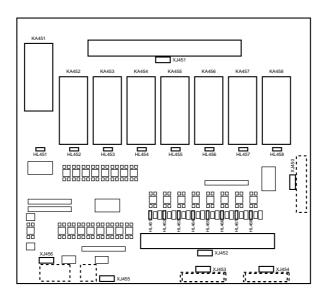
Relay Unit External Connection Terminal and Connecting Terminal Block Layout Drawing
